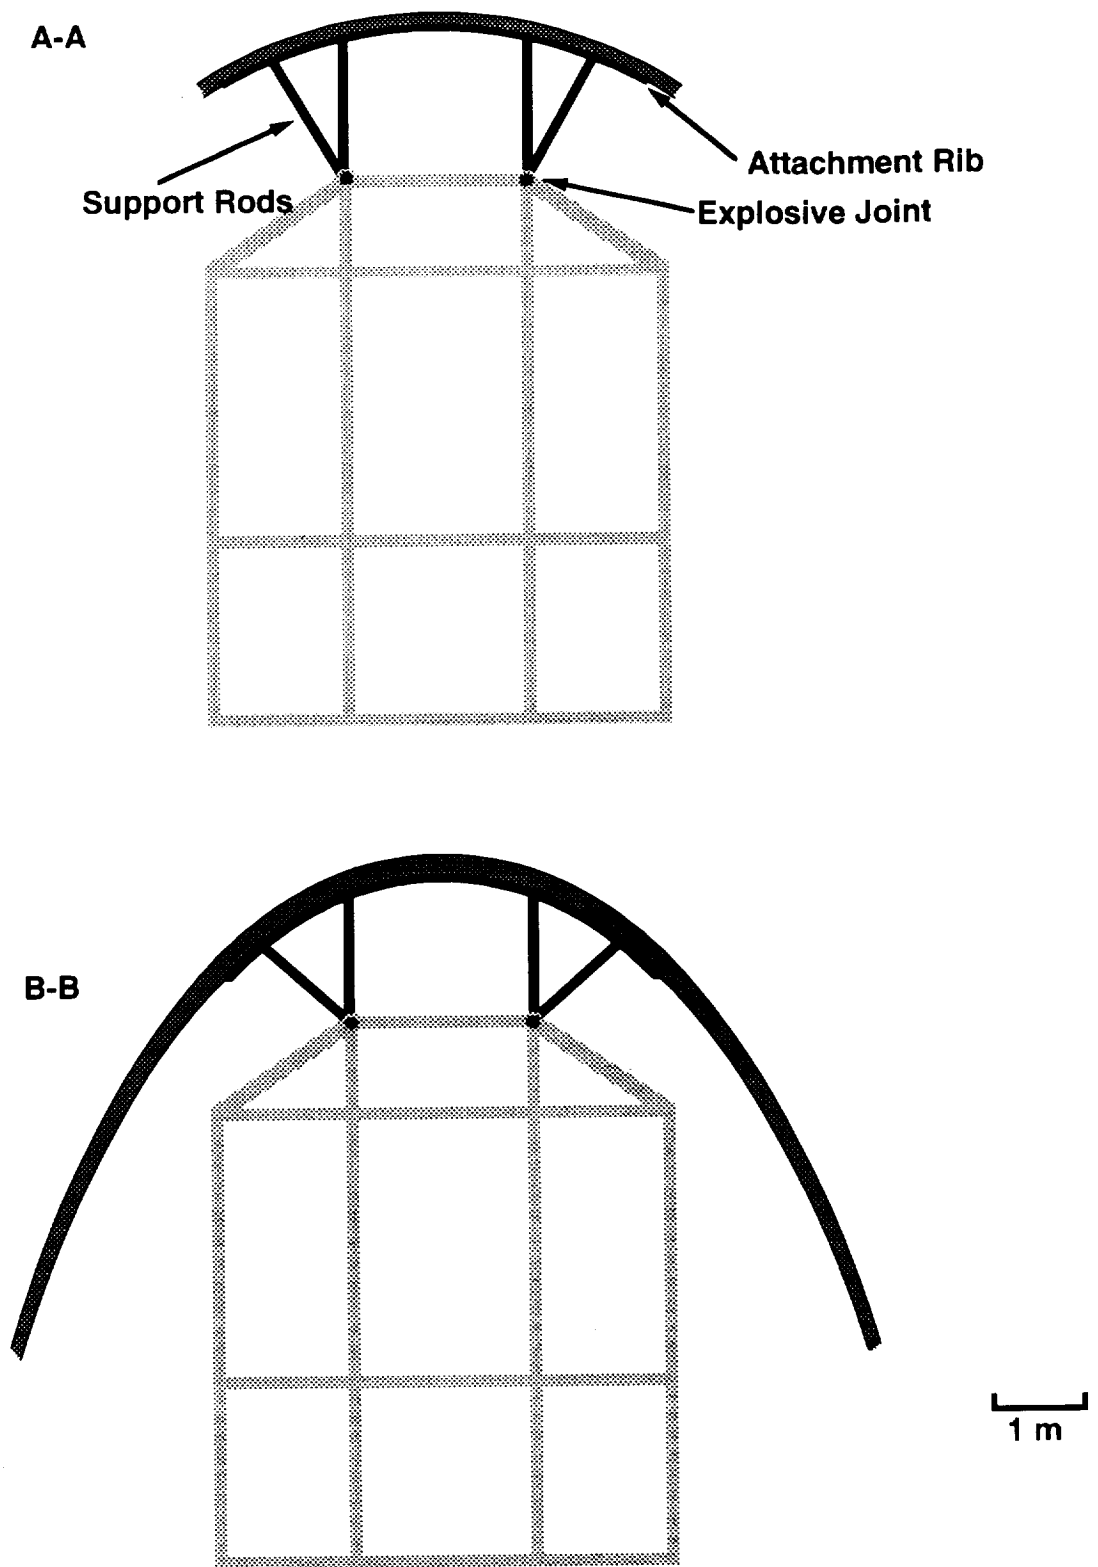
Views A-A and B-B of aero-brake attachment points.
